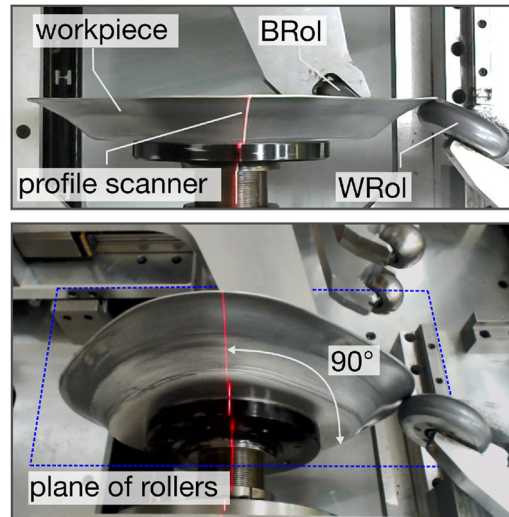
Wall profile measurement using a laser profile scanner, which records the shape of the workpiece at 90° to the plane of the rollers.
